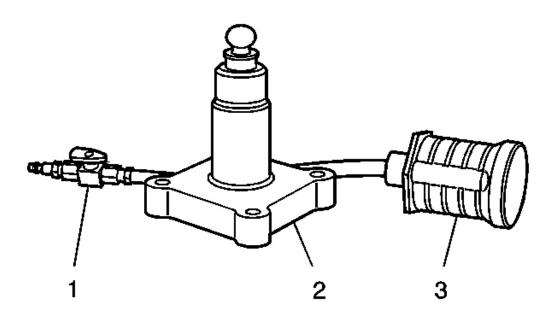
Cylinder Liner Trimming Tools View (1 Of 2) Courtesy of GENERAL MOTORS CORP.
